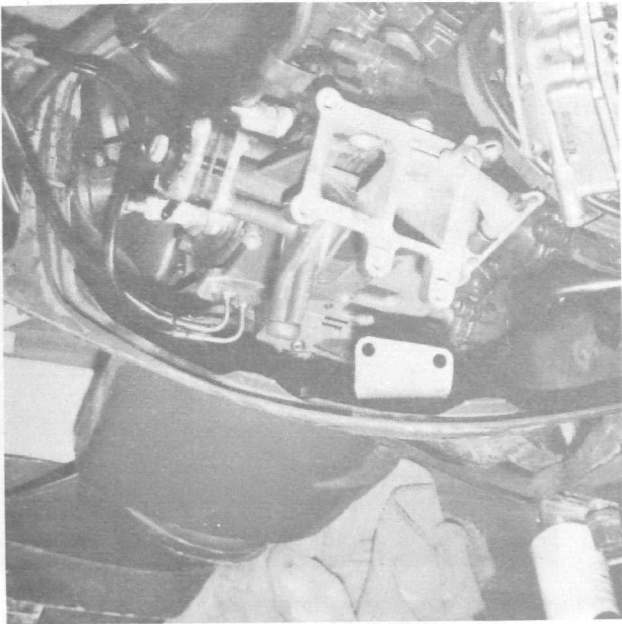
Modified inlet manifold moved back on engine 24 to show check valve and blocked passages
